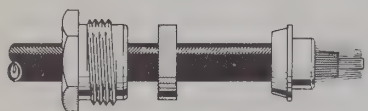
CC-10A Custom Control Unit, Assembly Details
